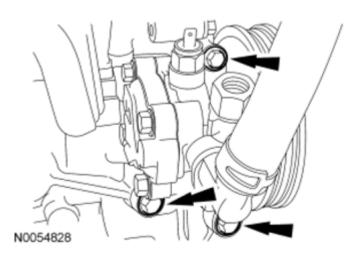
Locating Power Steering Pump Bolts Courtesy of FORD MOTOR CO.
